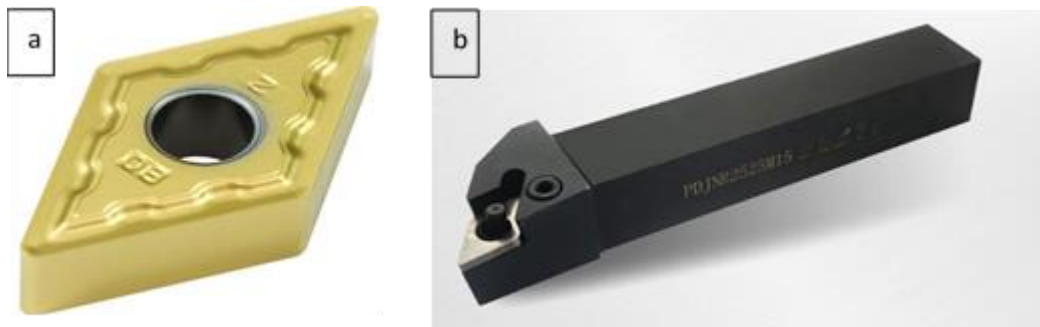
Turning Tool (a) DNMG carbide insert (b) Tool holder
